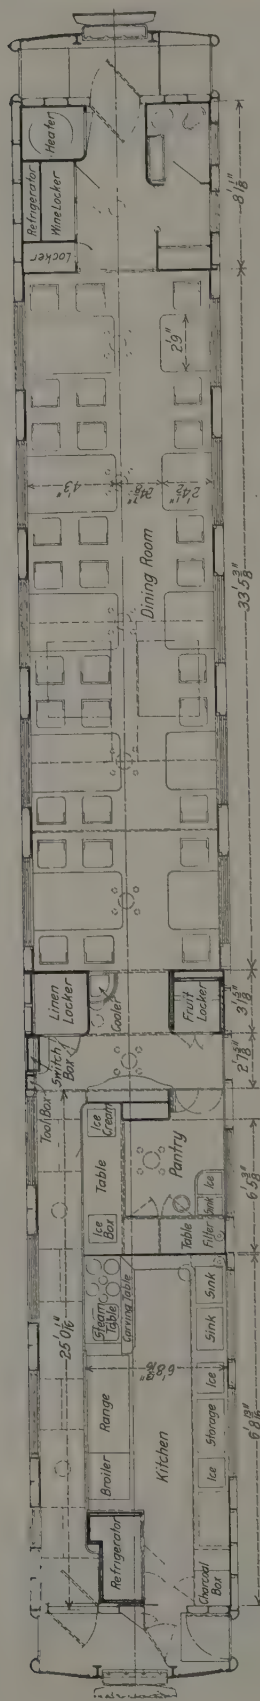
Floor Plan of Union Pacific Steel Dining Car. Builder, The Pullman Company.
